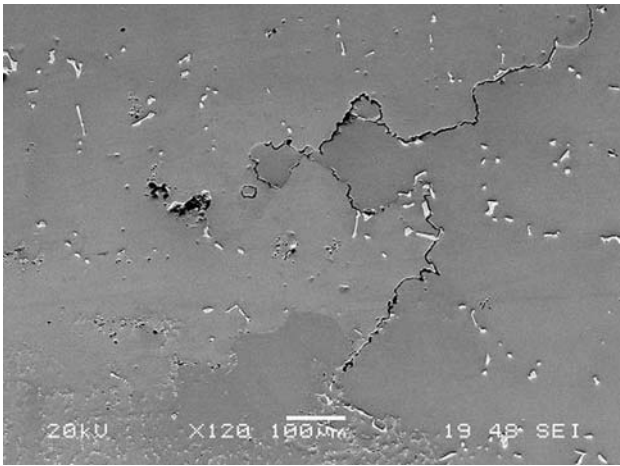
Cracks in the heat affected zone of as-cast Inconel 738 gas tungsten arc welded with Inconel 625 filler. Filler is visible at lower left edge of image
